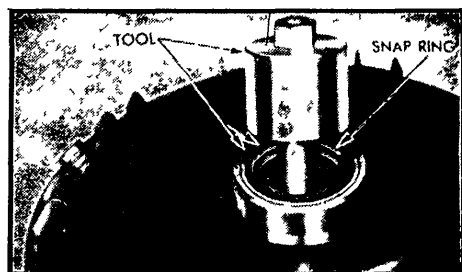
Tool in position for installing snap ring, 1939-52 fluid drive
